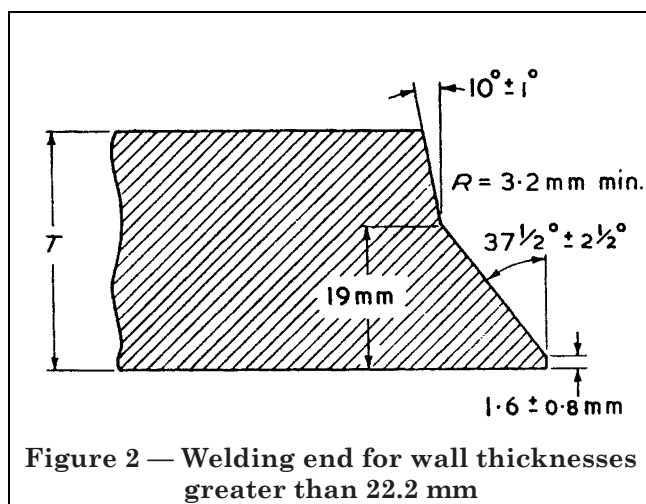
Welding end for wall thicknesses greater than 22.2 mm
